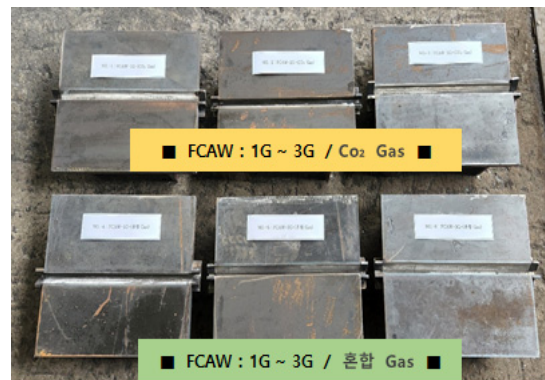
Welded structures according to the shielding gas and welding positions
